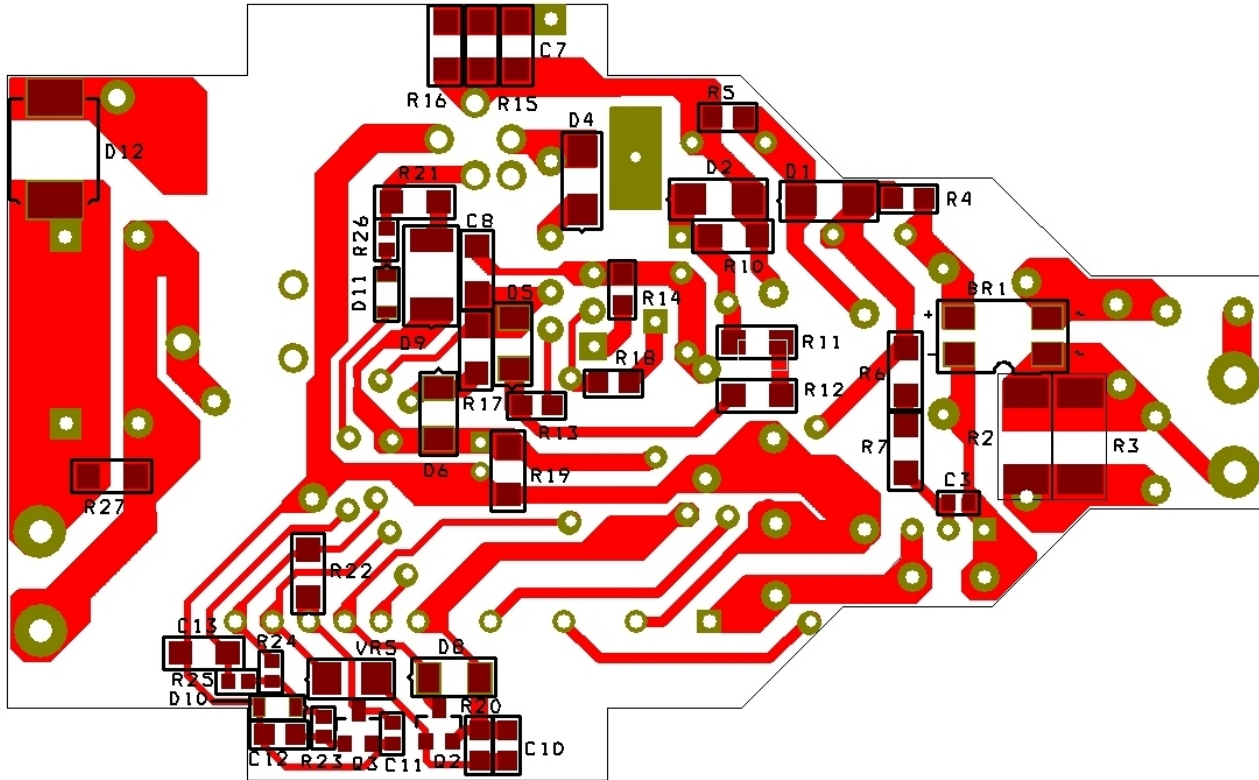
Printed Circuit Layout, Bottom Side (Main Board).
